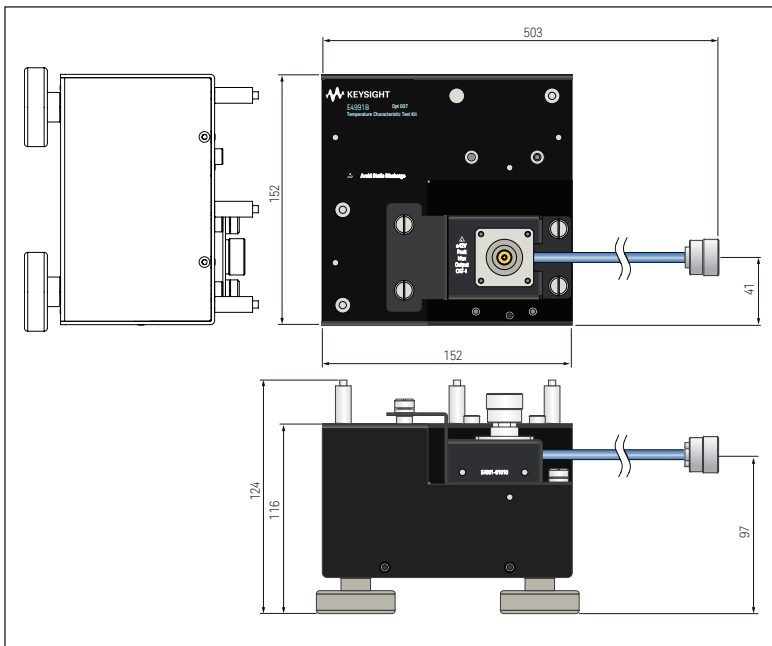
Option E4991B-007 test head dimensions (in millimeters)
